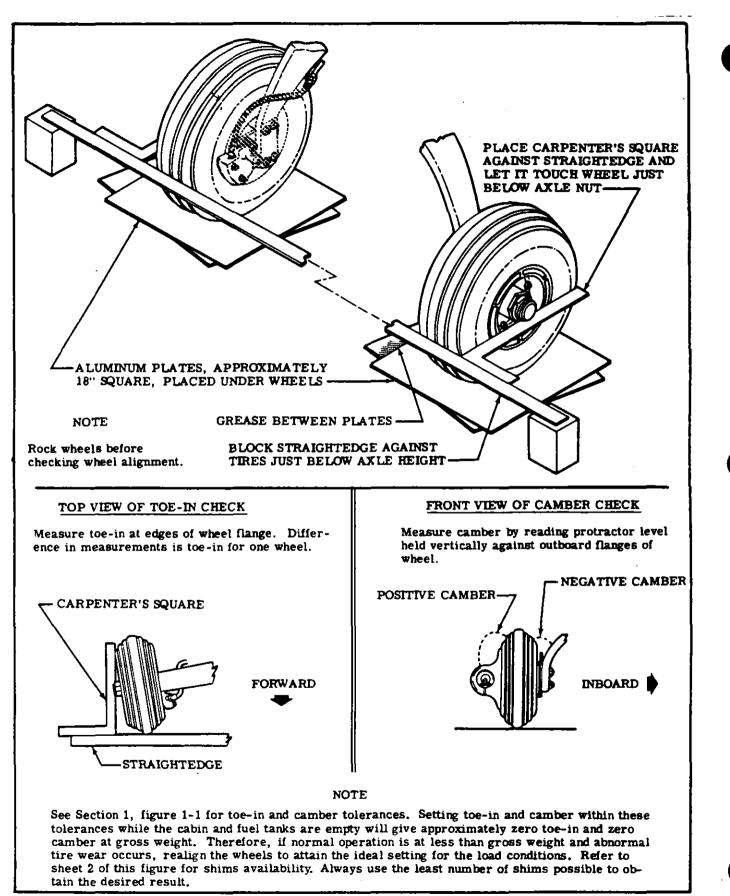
Main Wheel Alignment (Sheet 1 of 2)
